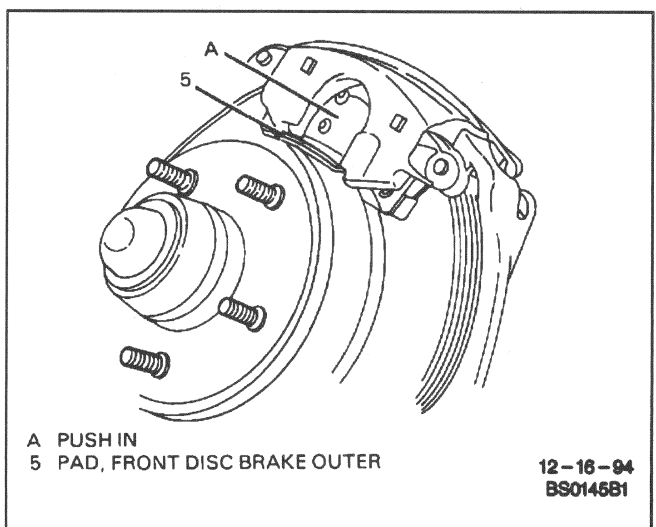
Checking Front Disc Brake Outer Pad Clench
